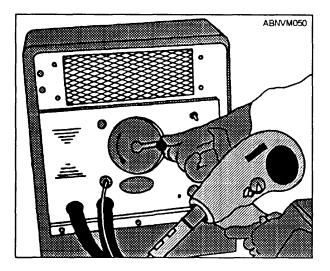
GMA welding equipment (AIRCO products).
